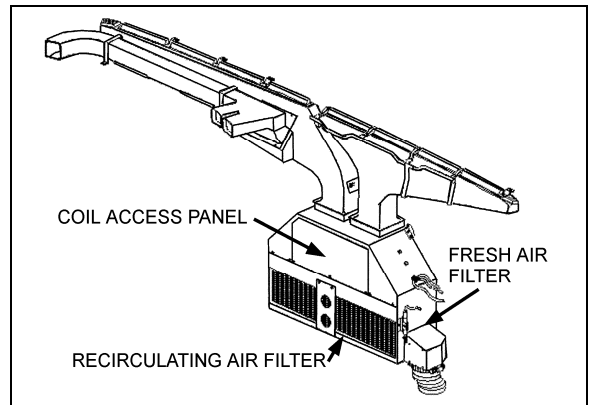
DRIVER'S SECTION AIR FILTERS 22171
